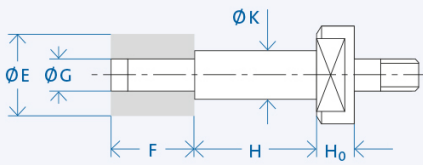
WITH ADJUSTMENT SCREW (PS)
